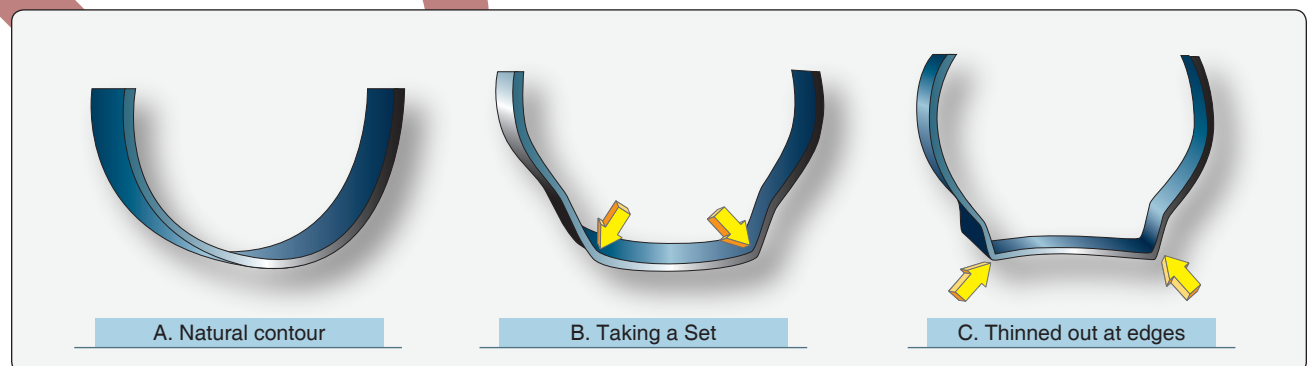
During inspection, an aircraft tire tube should retain its natural contour. Tubes with thinned areas or that have taken a set should be discarded and replaced.
